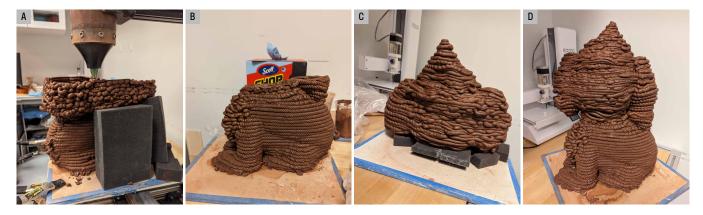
The fabrication process of Eun-ha's Obsidian poodle shown in Figure 1E. (A) Printing with foam supports for overhangs. (B) The poodle's head did not survive the print, leaving only the body. (C) Eun-ha printed the head separately. (D) The parts were manually attached together.
